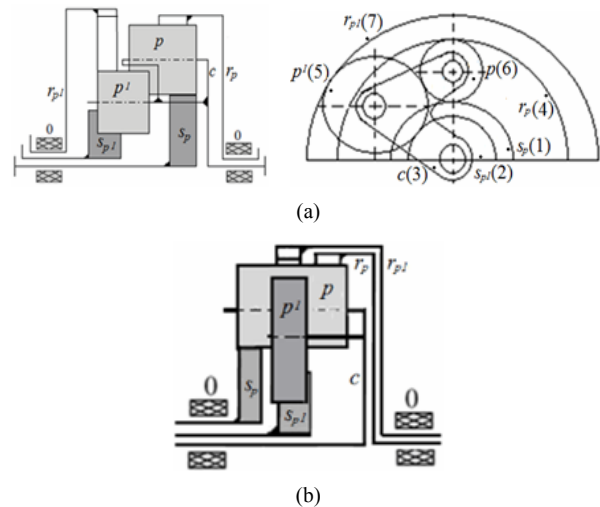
Eight-link Ravigneaux gear mechanisms.
